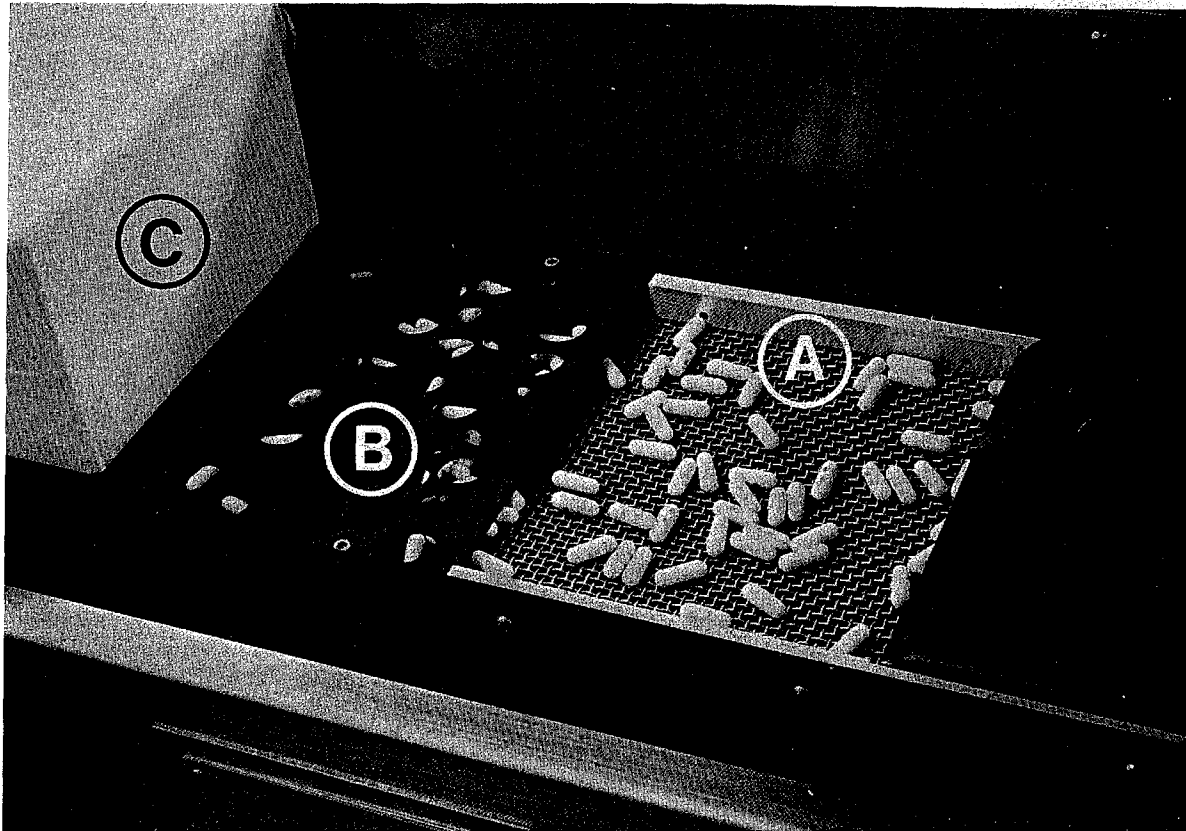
The three sections on the Elanco Rotosort capsule-sorting machine. A, powder separation; B, dual-plate sorter; C, vacuum pick-up.
